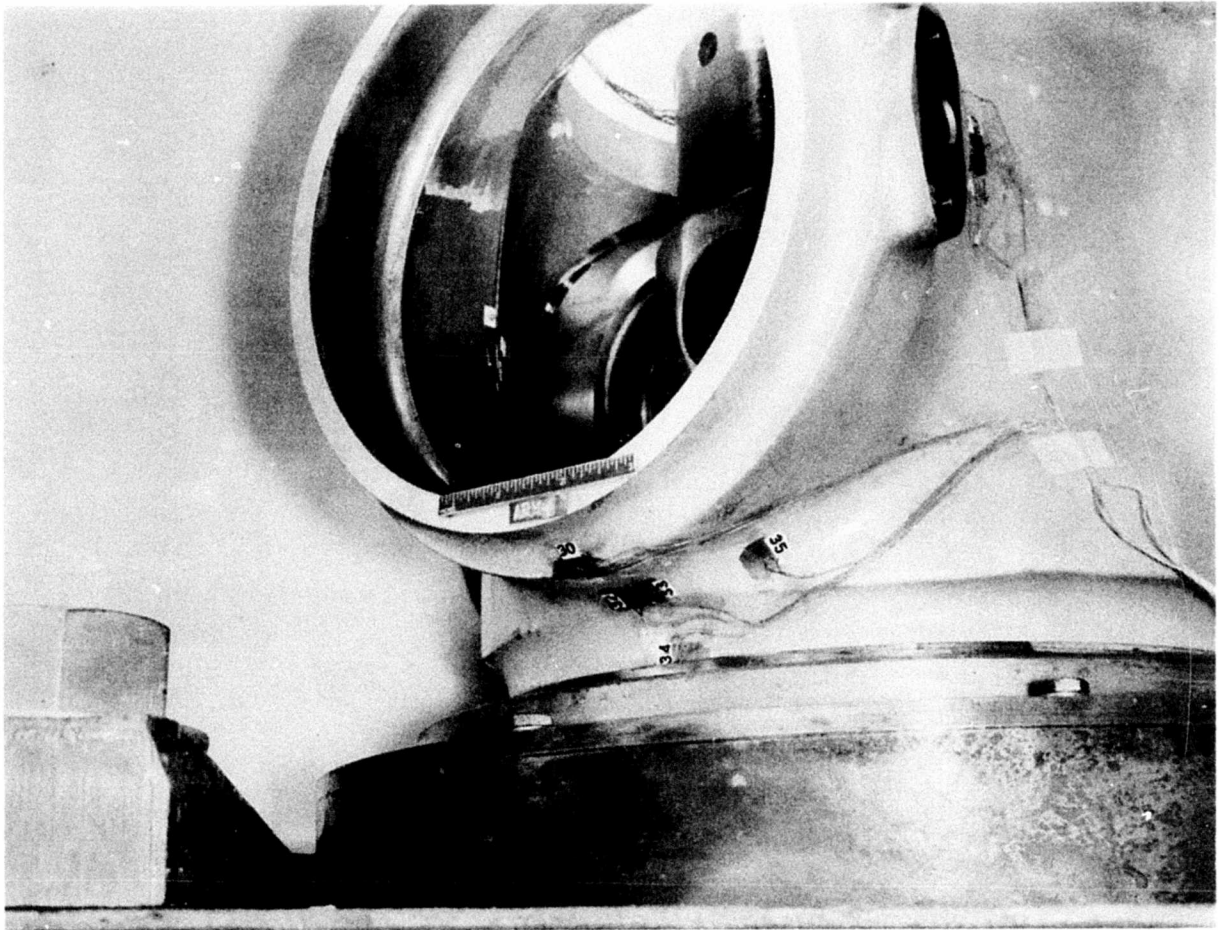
STRAIN-GAGE INSTALLATION, LOCATIONS 30 AND 32 THROUGH 35
